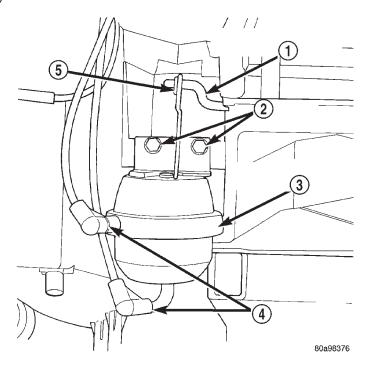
Floor-Defrost Door Actuator Remove/Install
